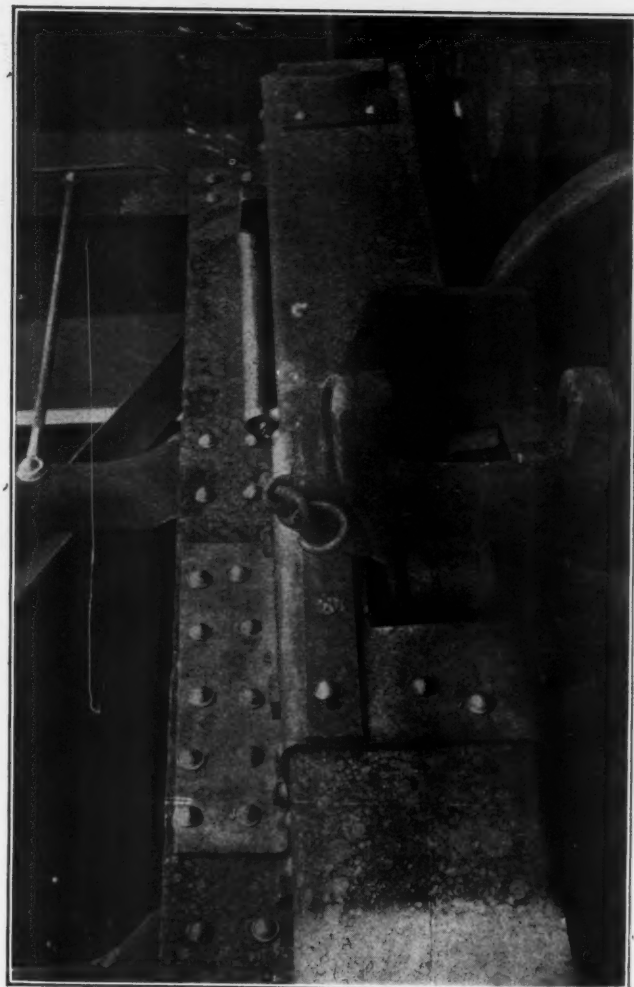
DAMAGED END SILL REPAIRED AND IN PLACE ON THE CAR.
